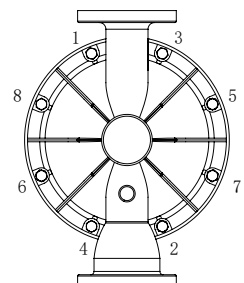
Disassembly Sequence of Bolts on Outer Chamber 外腔体螺栓的拆卸顺序
